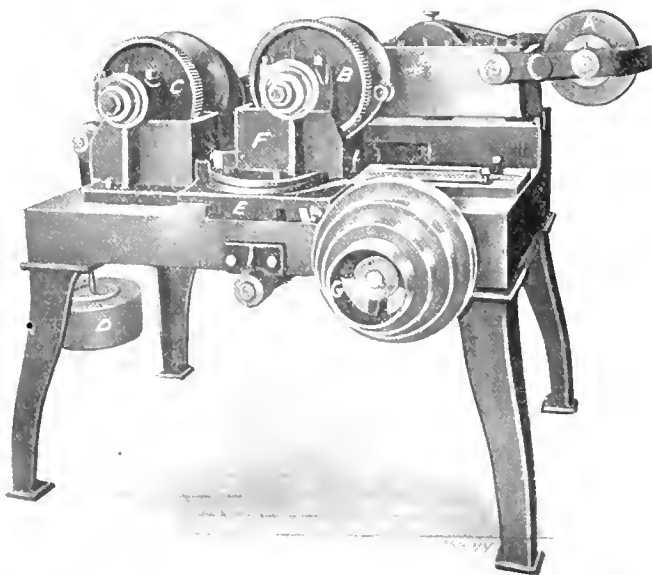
Driving Side of Machine, showing Adjustment of Follow Roll Bracket on Cutter Side
